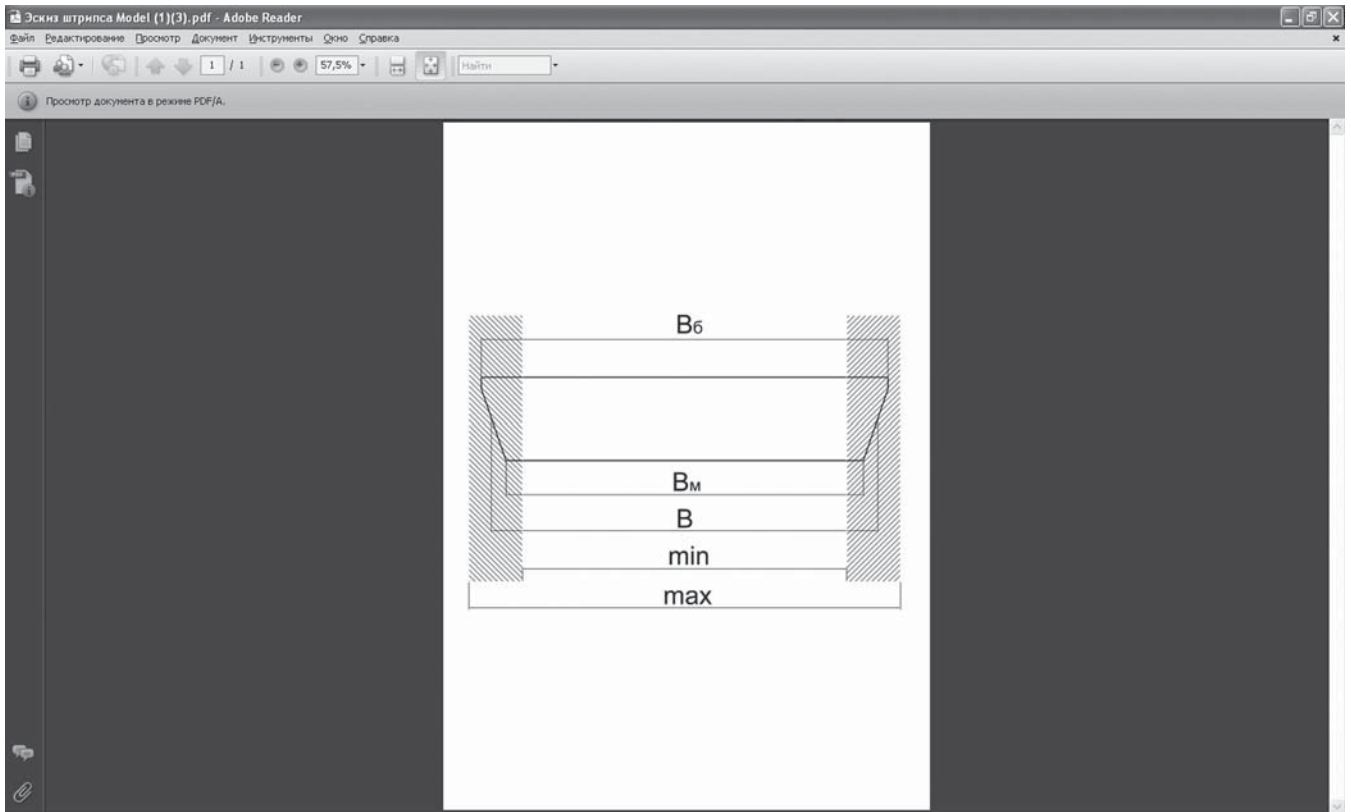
Cross section of a tube strip:  $B_6$  ( $B_b$ ) – width of the larger side of tube strip;  $B_M$  ( $B_m$ ) – width of the smaller side of tube strip;  $B$  – width of tube strip;  $min$  – minimal width of tube strip according to the standard for finished products (tube strip);  $max$  – maximal width of tube strip according to the standard for finished products (tube strip).
